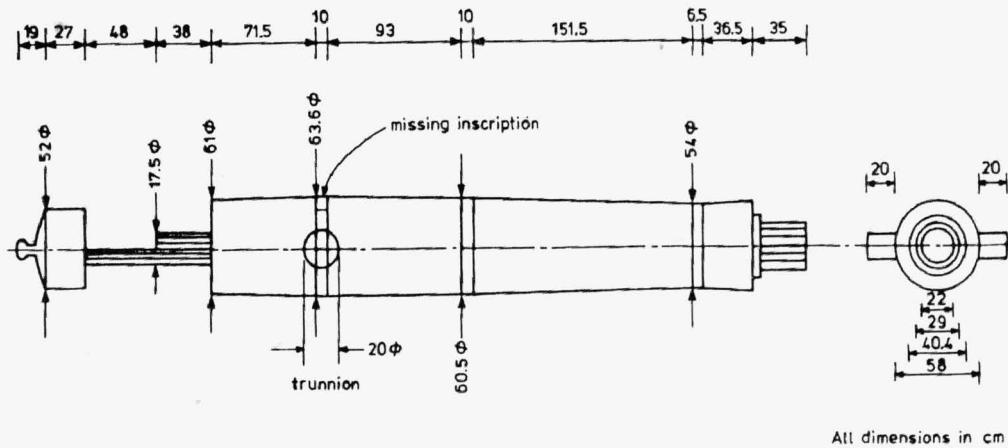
Engineering drawing of the cannon showing the prominent dimensions.
